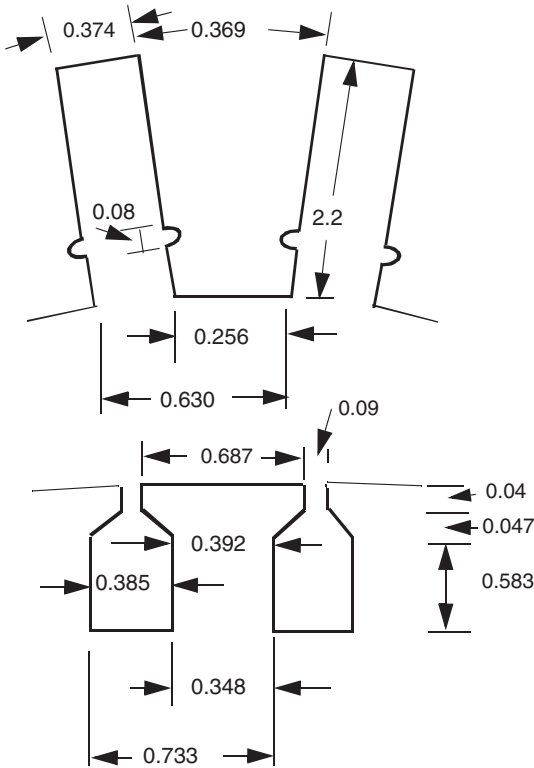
Details of the stator and rotor slot shapes for 250 HP induction machine.
